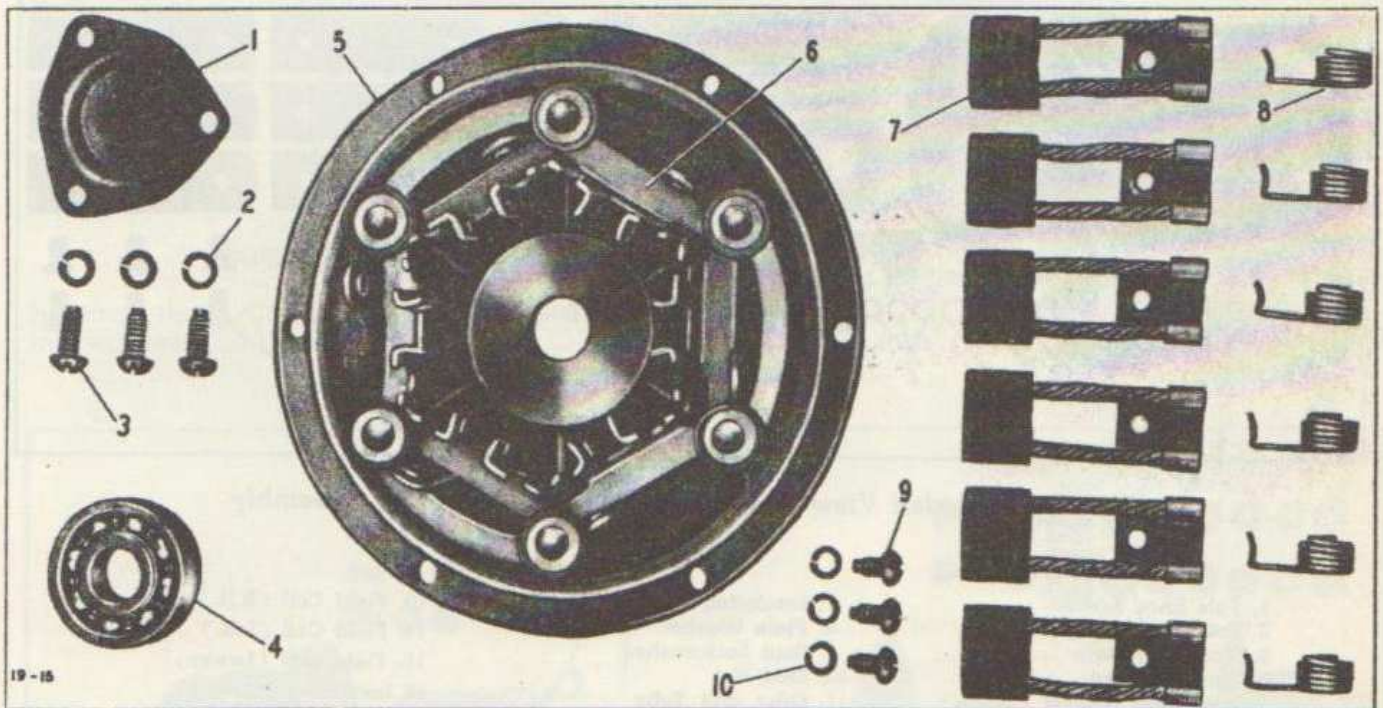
Exploded View of Starting Motor Commutator End Frame Assembly
